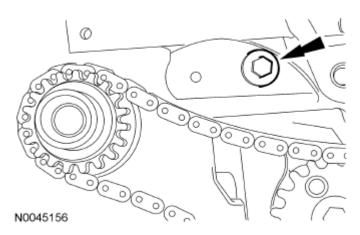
Locating Oil Pump Chain Drive Tensioner Shoulder Bolt Courtesy of FORD MOTOR CO.
